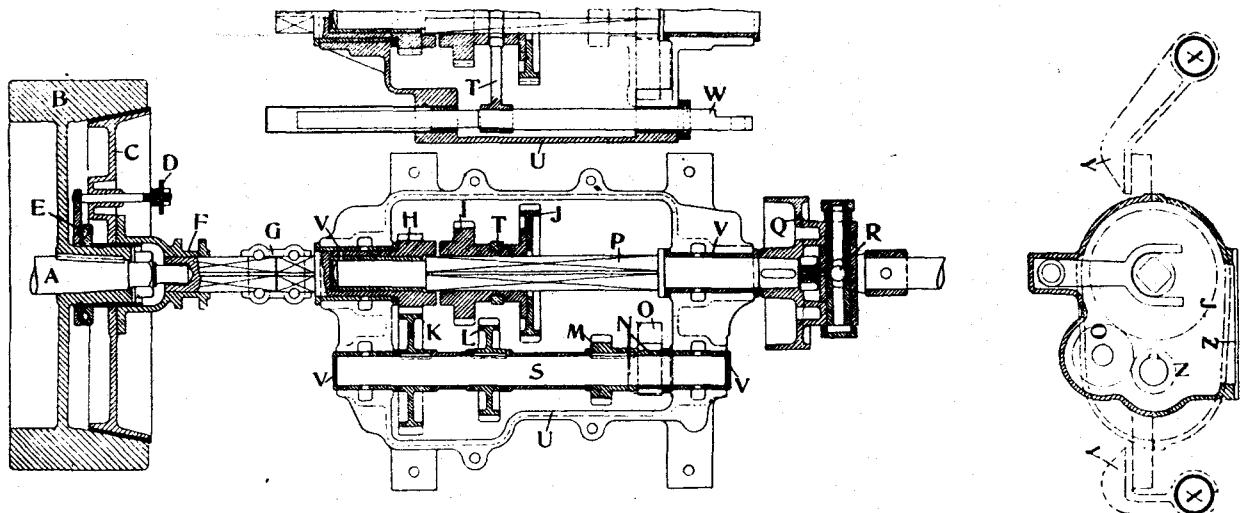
Vertical and horizontal section and end view of Humber clutch, gear-box, and brake drum.
